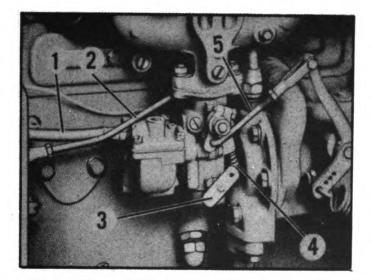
STARTING ENGINE CARBURETOR 1. Gasoline inlet. 2. Throttle control. 3. Choke. 4. Idle adjustment. 5. Governor rod.
